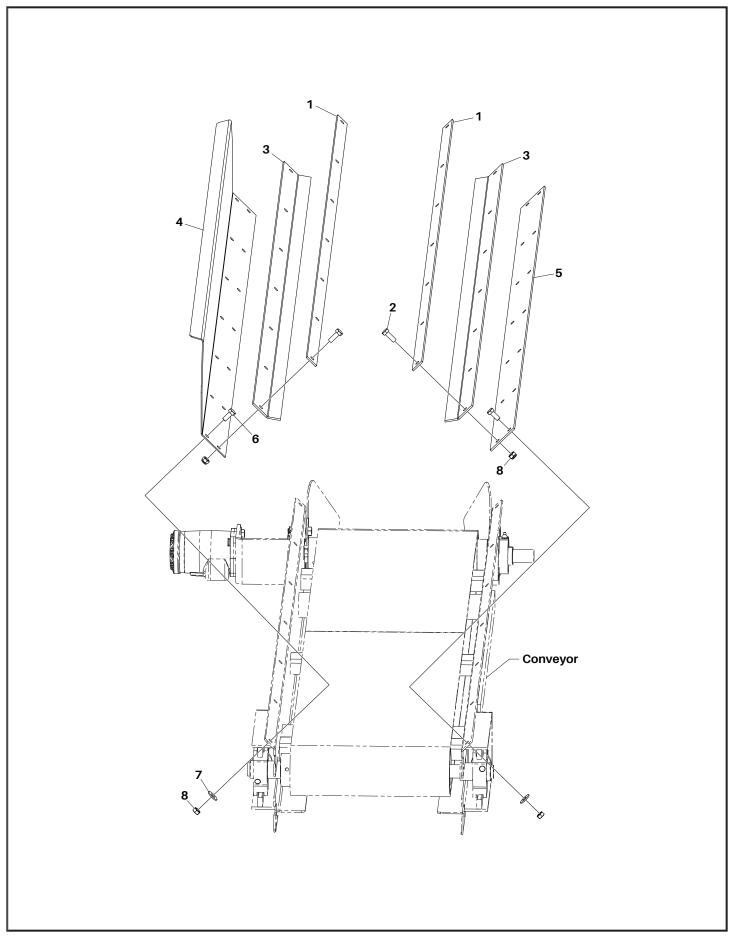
Cross Conveyor Rubber Skirt Assembly
